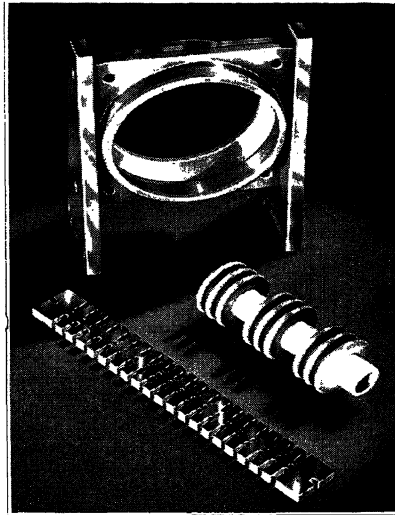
Parts fabricated from "Synthane" rods and tubes.
